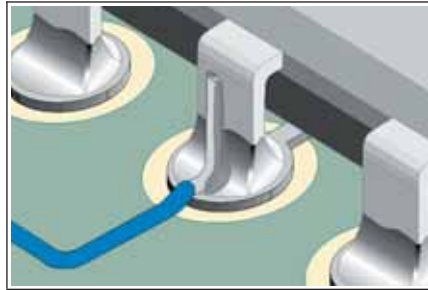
Acceptable Wire soldered parallel to lead on component side.
